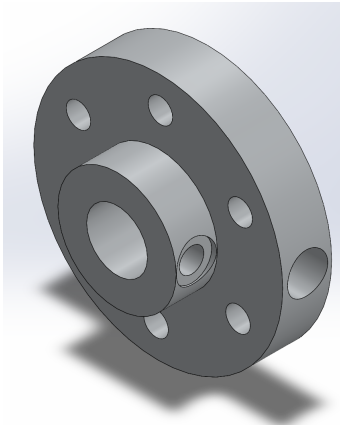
Components designed from the specification of the Pololu Universal Aluminum Mounting Hub for 6mm Shaft, M3 Holes
